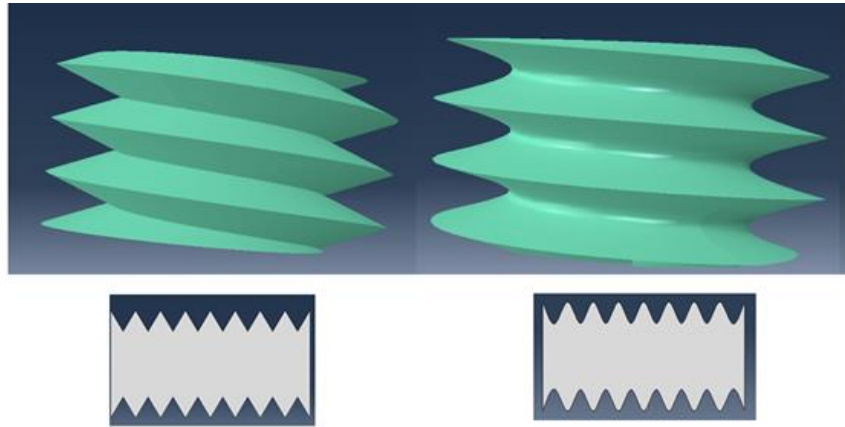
Isometric and cross-sectional views of threaded pins with sharp edges (left) and smoothened edges (right)
